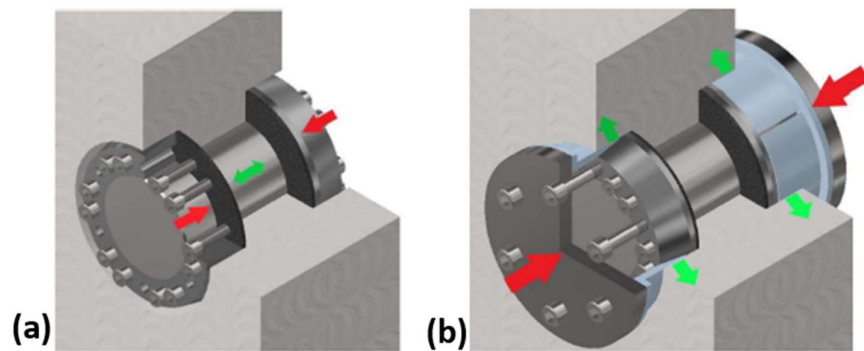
Function of tightening screws for achieving; a) preload, and b) radial locking
